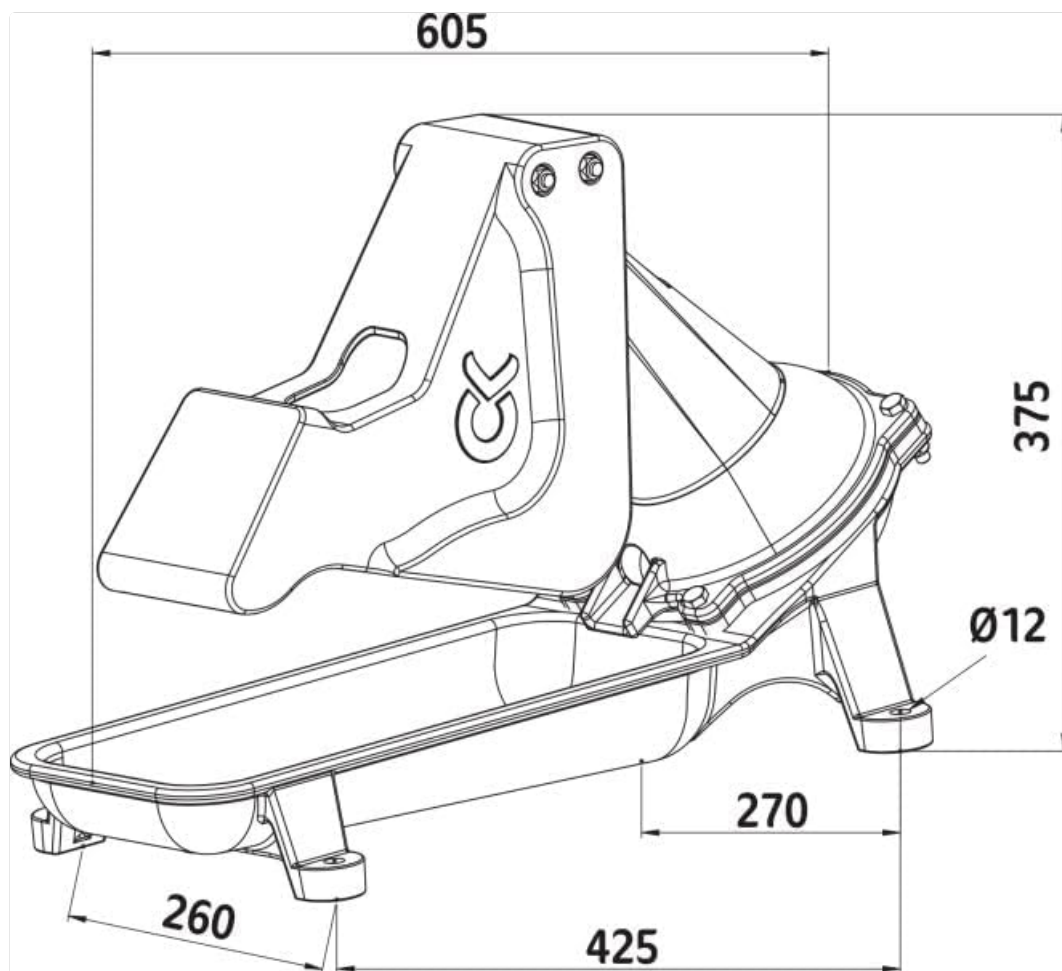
Dimensional drawing of the Kerbl P100 Willow Pump, showing overall dimensions and mounting hole spacing for installation planning.
